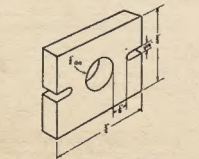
Dimensions of the insulating spacers used to hold bridge wires and outer conductor strips in place.
